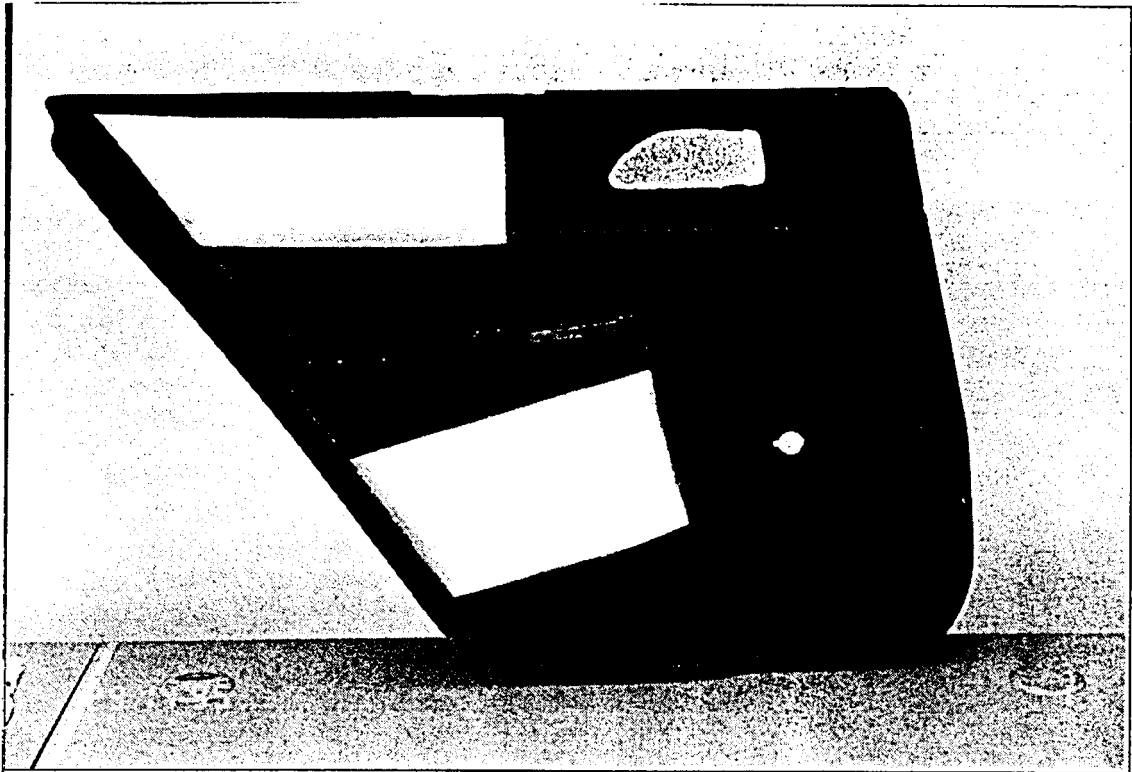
Modified Rear Left Honda Accord Door Assembly (Viewed From Inside)
